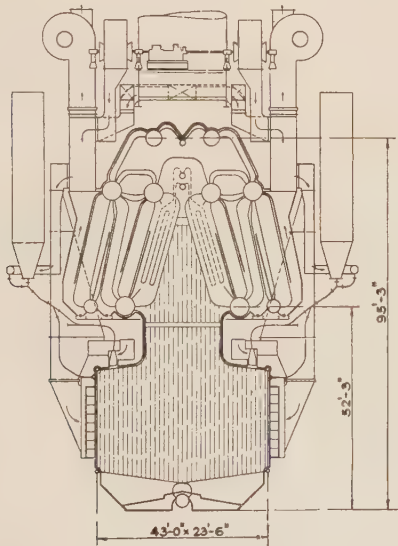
CROSS-SECTION NEW BOILER UNITS
